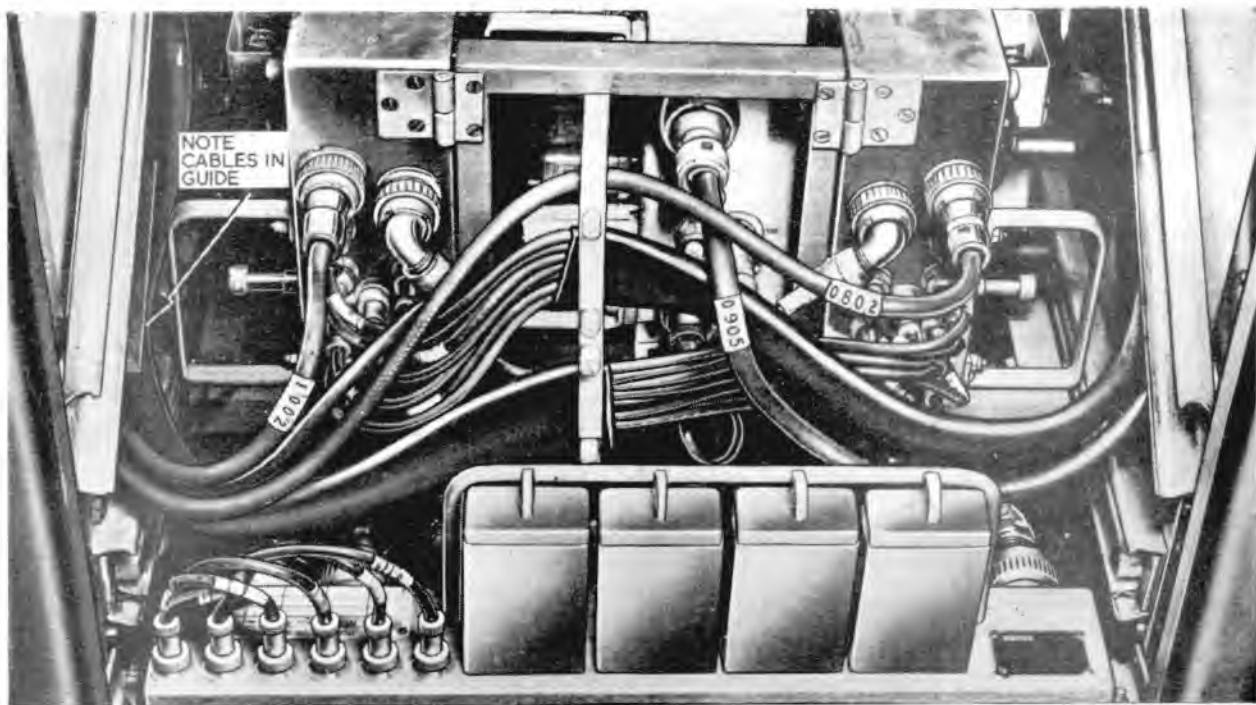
Console Type 64—lower unit pushed home (close-up)
